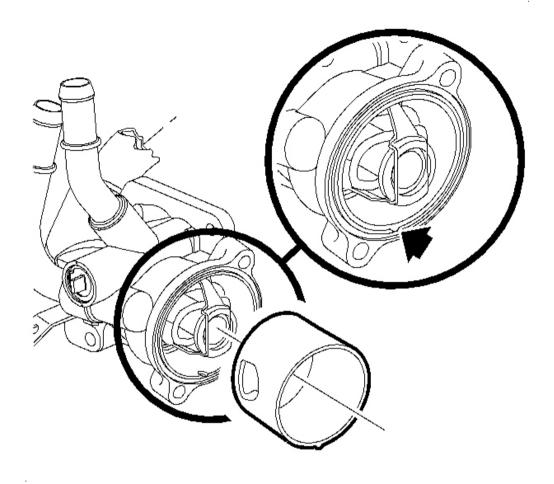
View Of Thermostat Courtesy of GENERAL MOTORS CORP.
